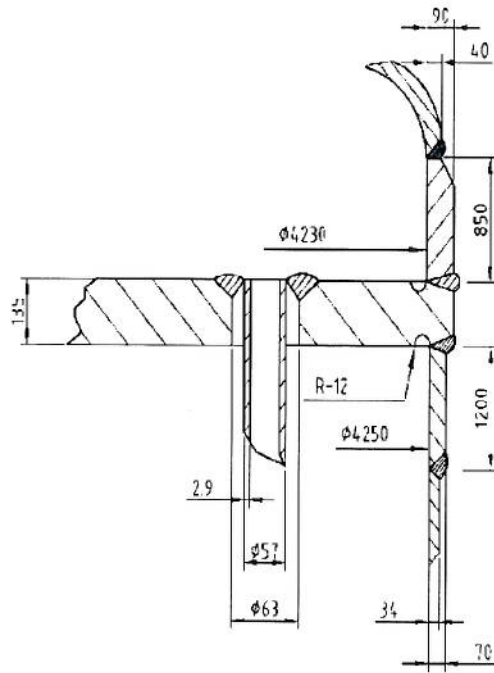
TUBE SHEET CONFIGURATION (DIMENSIONS (mm), NOT TO SCALE).
